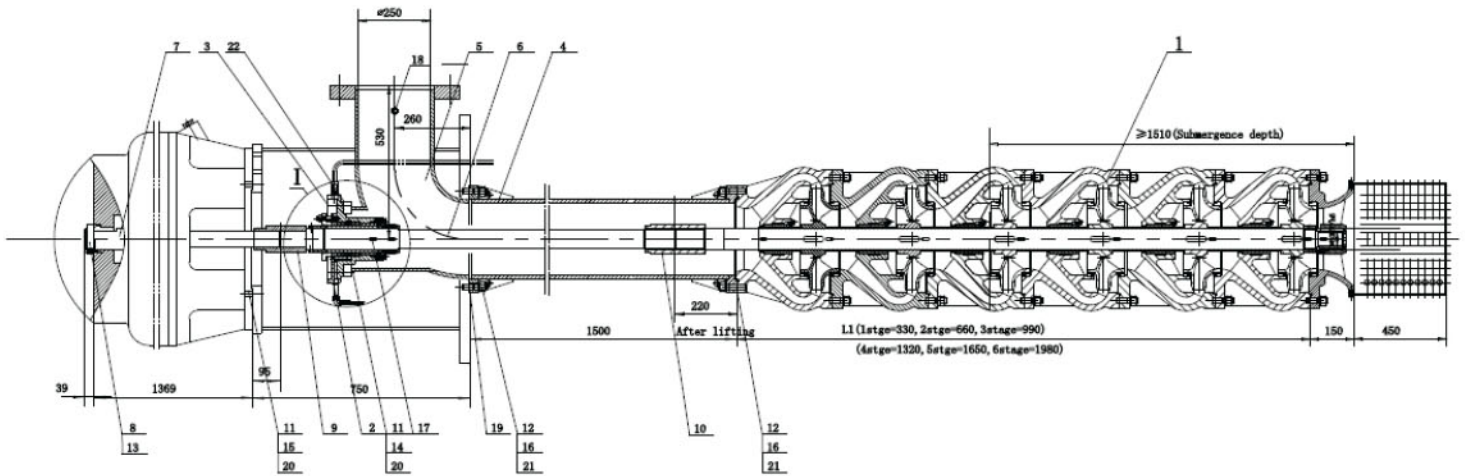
Vertical Turbine Pump Cross Sectional Drawing
